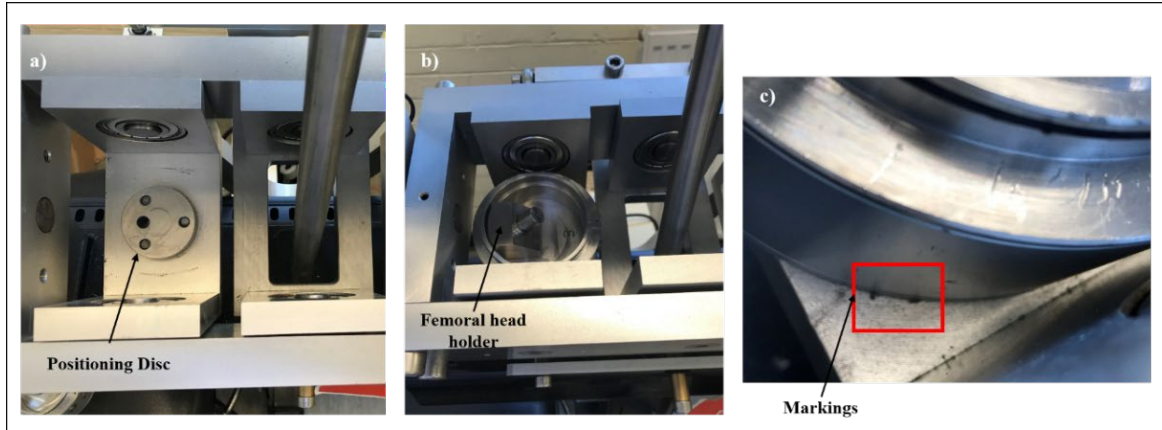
a) A positioning disc, b) a femoral head holder fixed on the positioning discs, and c) markings on the femoral head carrier casing and the base plate for the exact location after disassembly.
